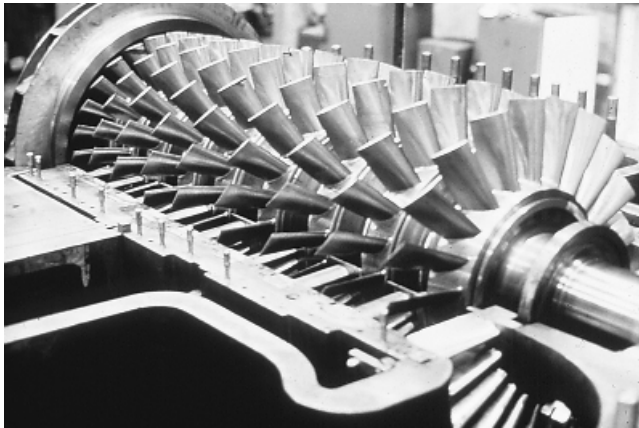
Axial-bladed compressor rotor. (*Dresser-Rand Company, Olean, N.Y.*)
